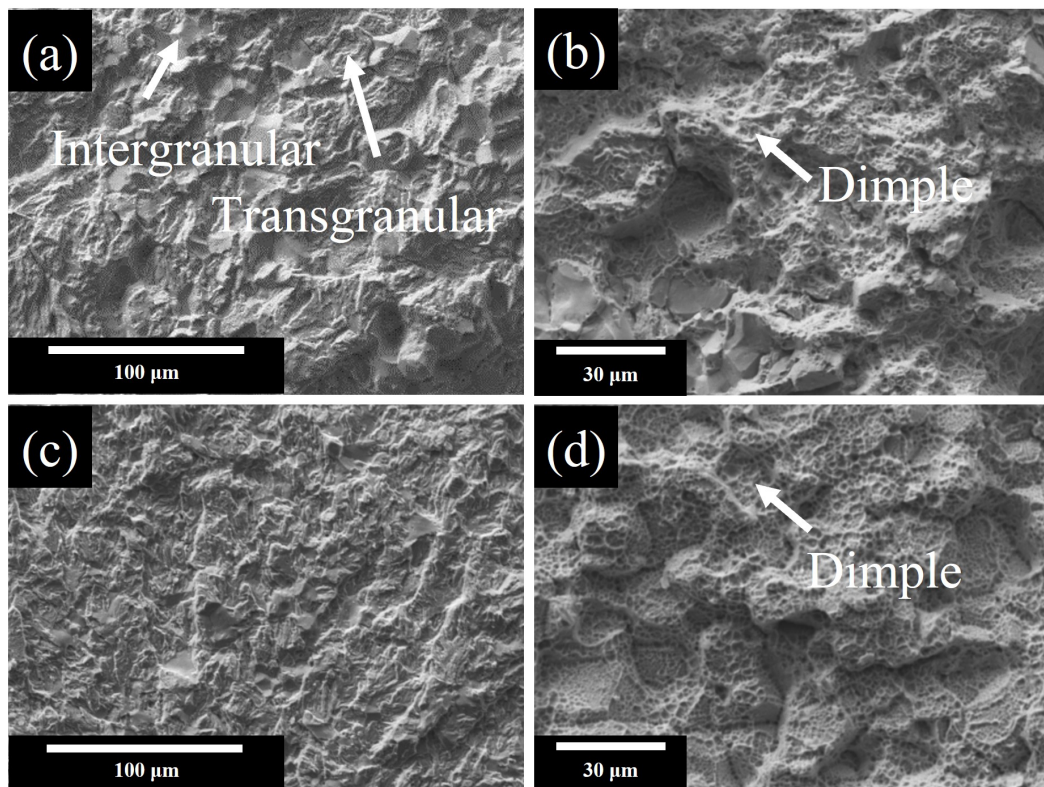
The fractography of final fracture areas for (a) (b) AB and (c) (d) P+AB specimens treated with HIP+QT [132].
